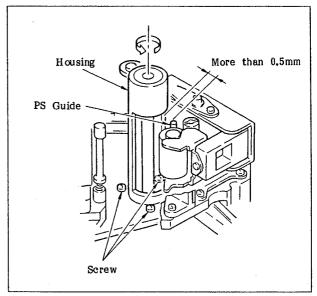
Adjustment of the Position of the PS Guide Assembly (1)
